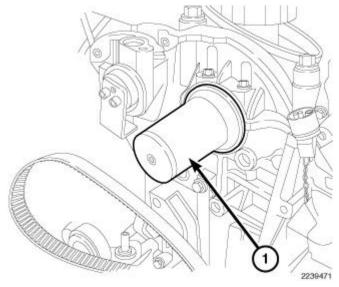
Seal Installer Courtesy of CHRYSLER LLC
